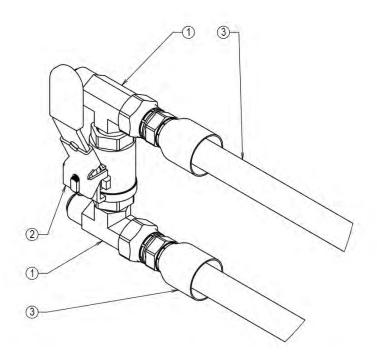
Roto-Shear Universal Hose Package A (UHK15-01)
